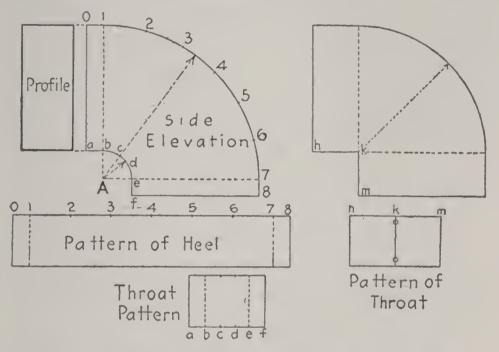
Elevation and Patterns of Rectangular Elbows.
